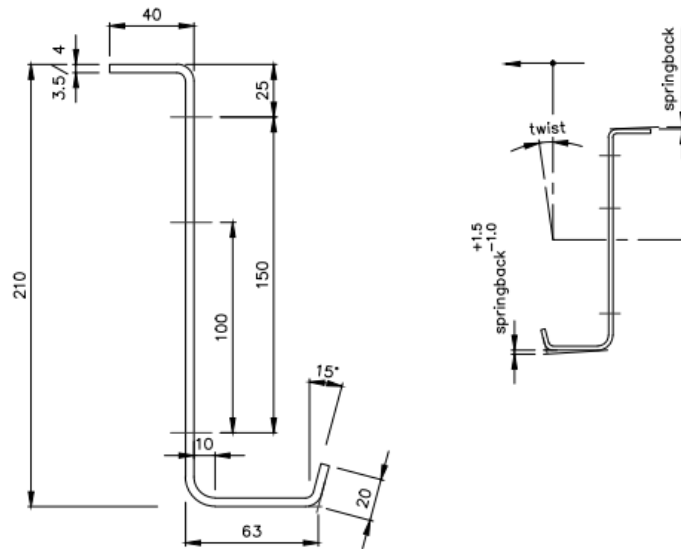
Geometry and dimensions of a profile used by industrial partners of FASTCOLD project.
